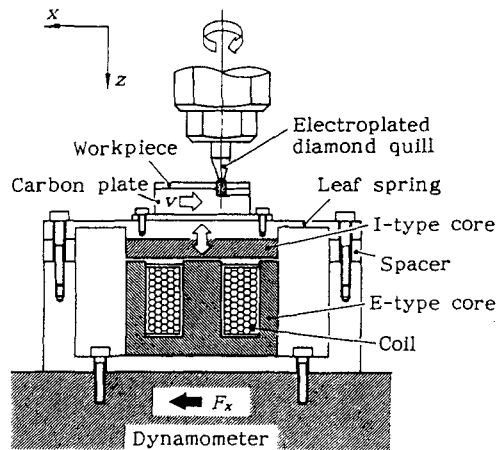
Setup of diamond quill, workpiece, oscillator and dynamometer
